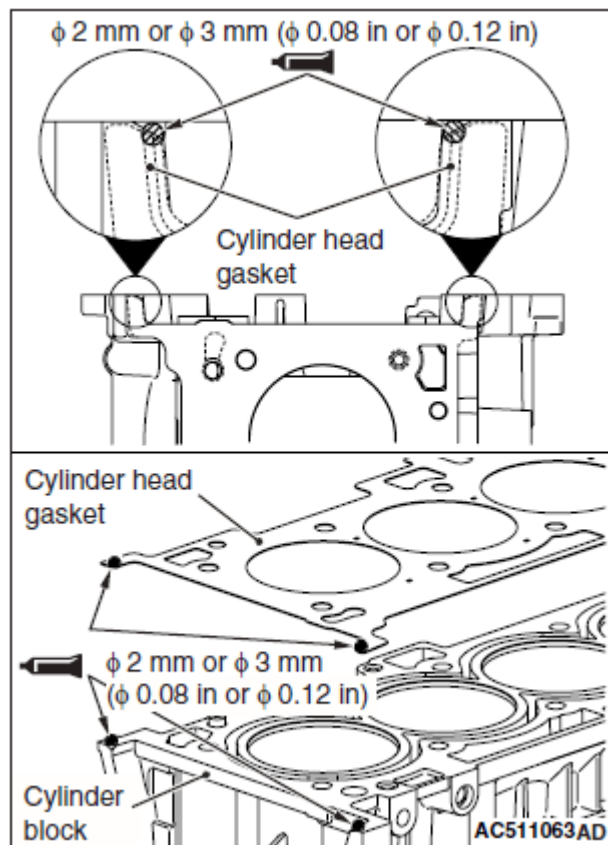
Applying Sealant To Top Surface Of Cylinder Head Gasket
